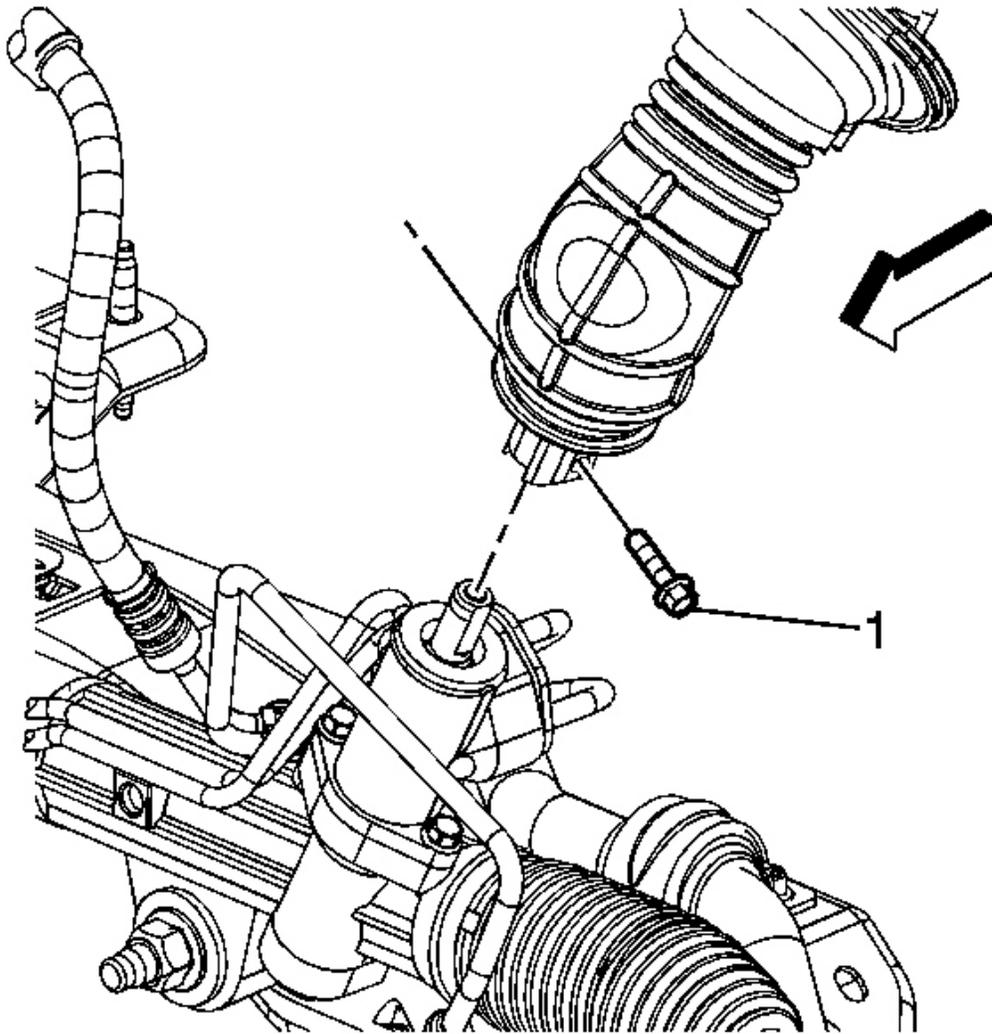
Identifying Intermediate Steering Shaft Bolt
